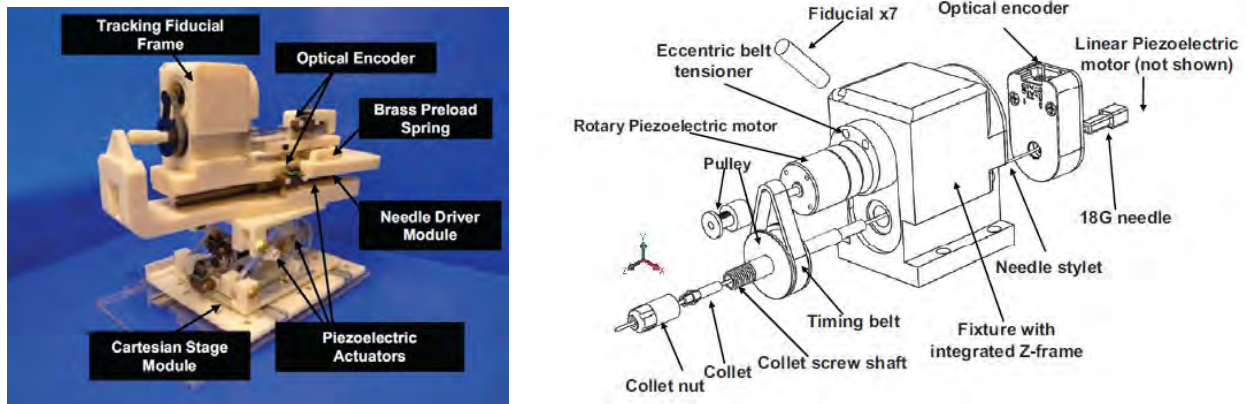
Physical prototype of 6-DOF piezoelectric actuated needle placement robot (left). An exploded view of the needle clamping mechanism, fiducial frame and motor fixture (right).
